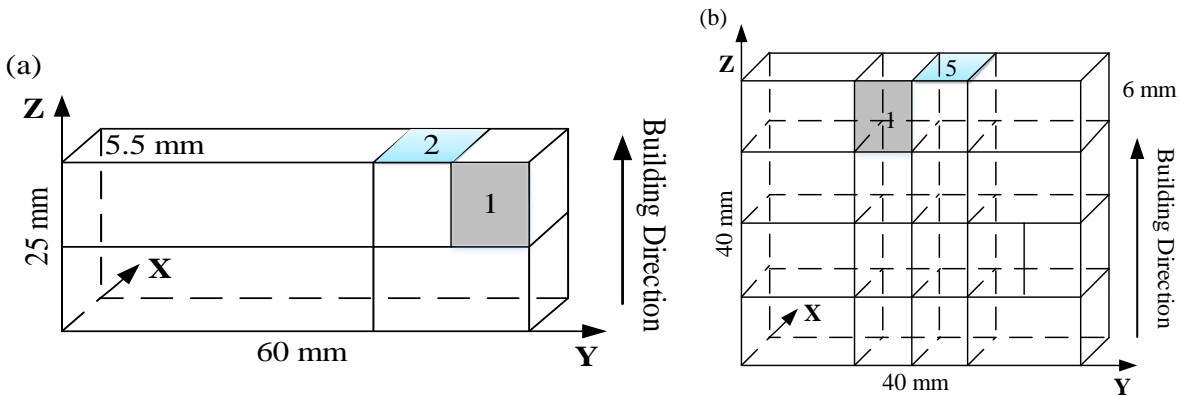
Samples location on the parts: (a) Ti-6Al-4V, and (b) Inconel 718
